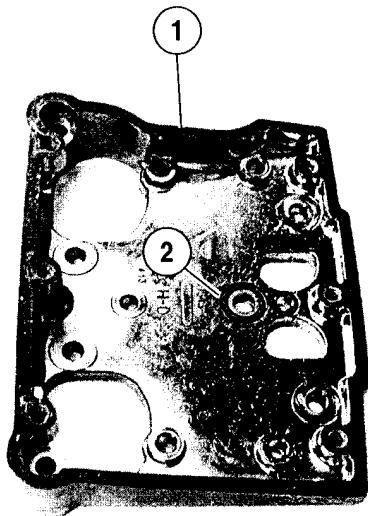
Install Rocker Housing Gasket (Rear Cylinder Shown)
